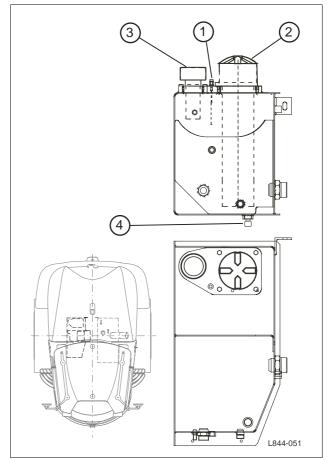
Checking hydraulic oil level, changing the hydraulic oil
